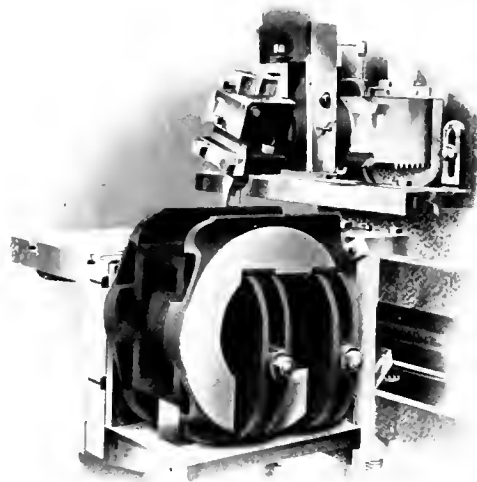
Method of Holding the Box while Planing Shoe and Wedge Fits
